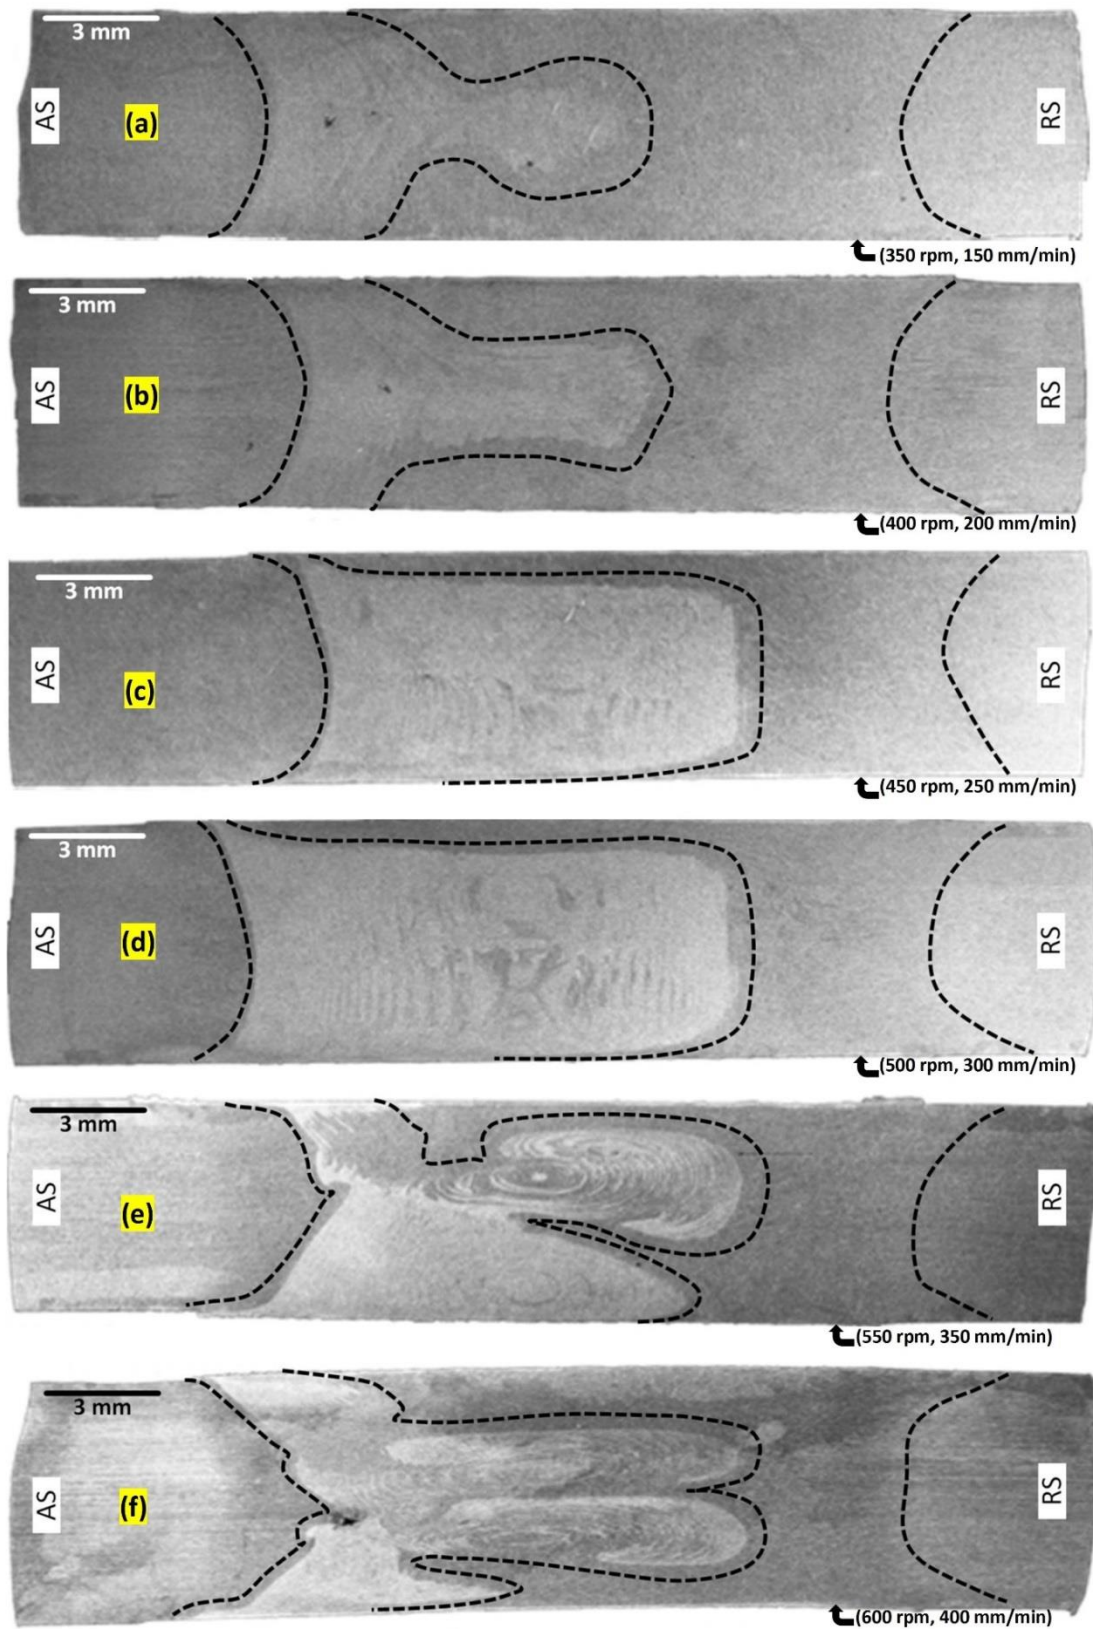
Macro-etched cross-section of the AA1100 BFSW weld samples in different welding speeds; (a) 350 rpm, 150 mm/min, (b) 400 rpm, 200 mm/min, (c) 450 rpm, 250 mm/min, (d) 500 rpm, 300 mm/min, (e) 550 rpm, 350 mm/min, (f) 600 rpm, 400 mm/min.
